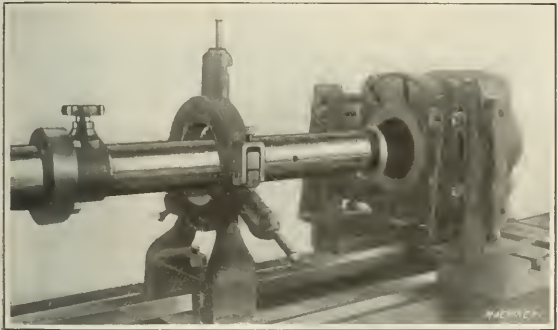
"Perfection" Cylinder Grinder made by Wood & Safford Machine Works for Use on Engine Lathe
